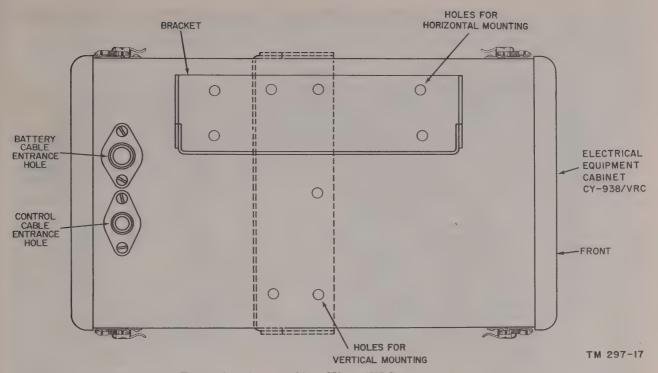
Electrical equipment cabinet CY-938/VRC, mounting bracket installation.
